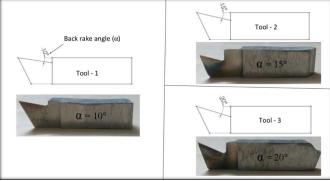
2D - Drawings of Tools with Varying Back Rake-Angles
